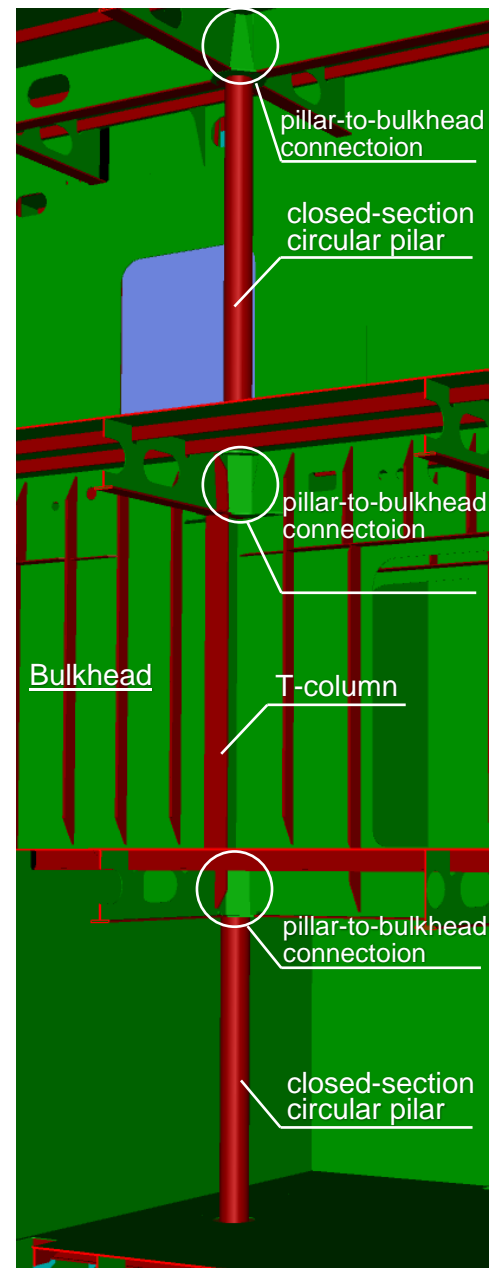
Typical bulkhead structure with T-shaped column in a way of pillar
